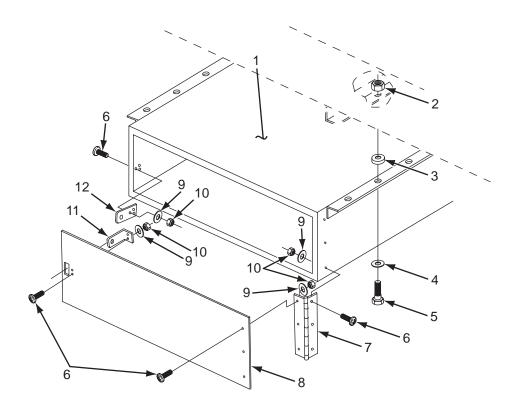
STOWAGE COMPARTMENT ASSEMBLY
